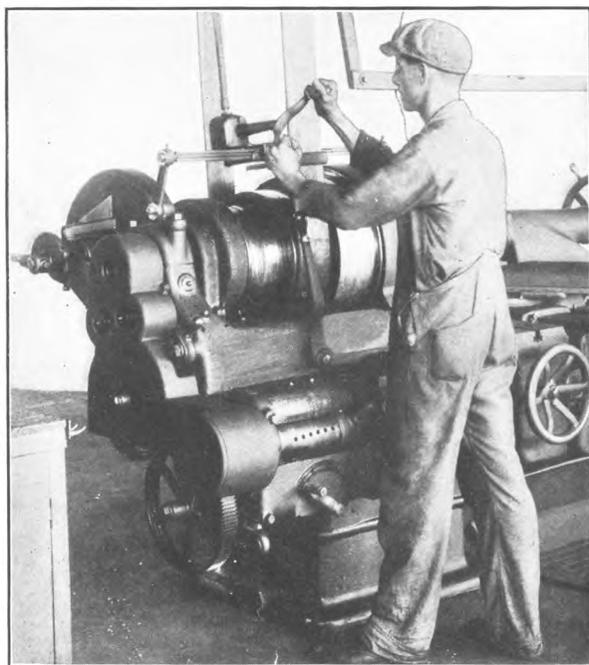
BELT SHIFTING WITH SHIFTER.
